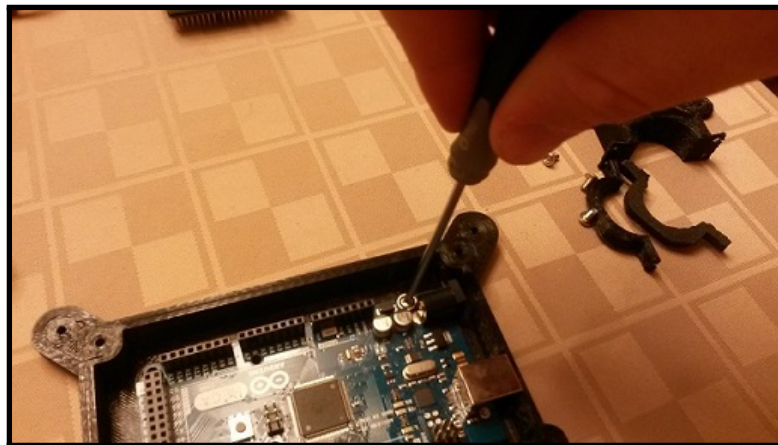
Fasten Screws with Phillips Head Screw Driver
